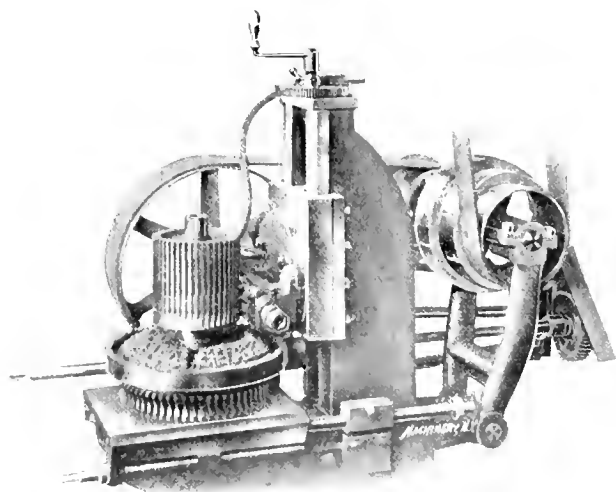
View from the Right Side showing Stop Screw for Depth of Cut
